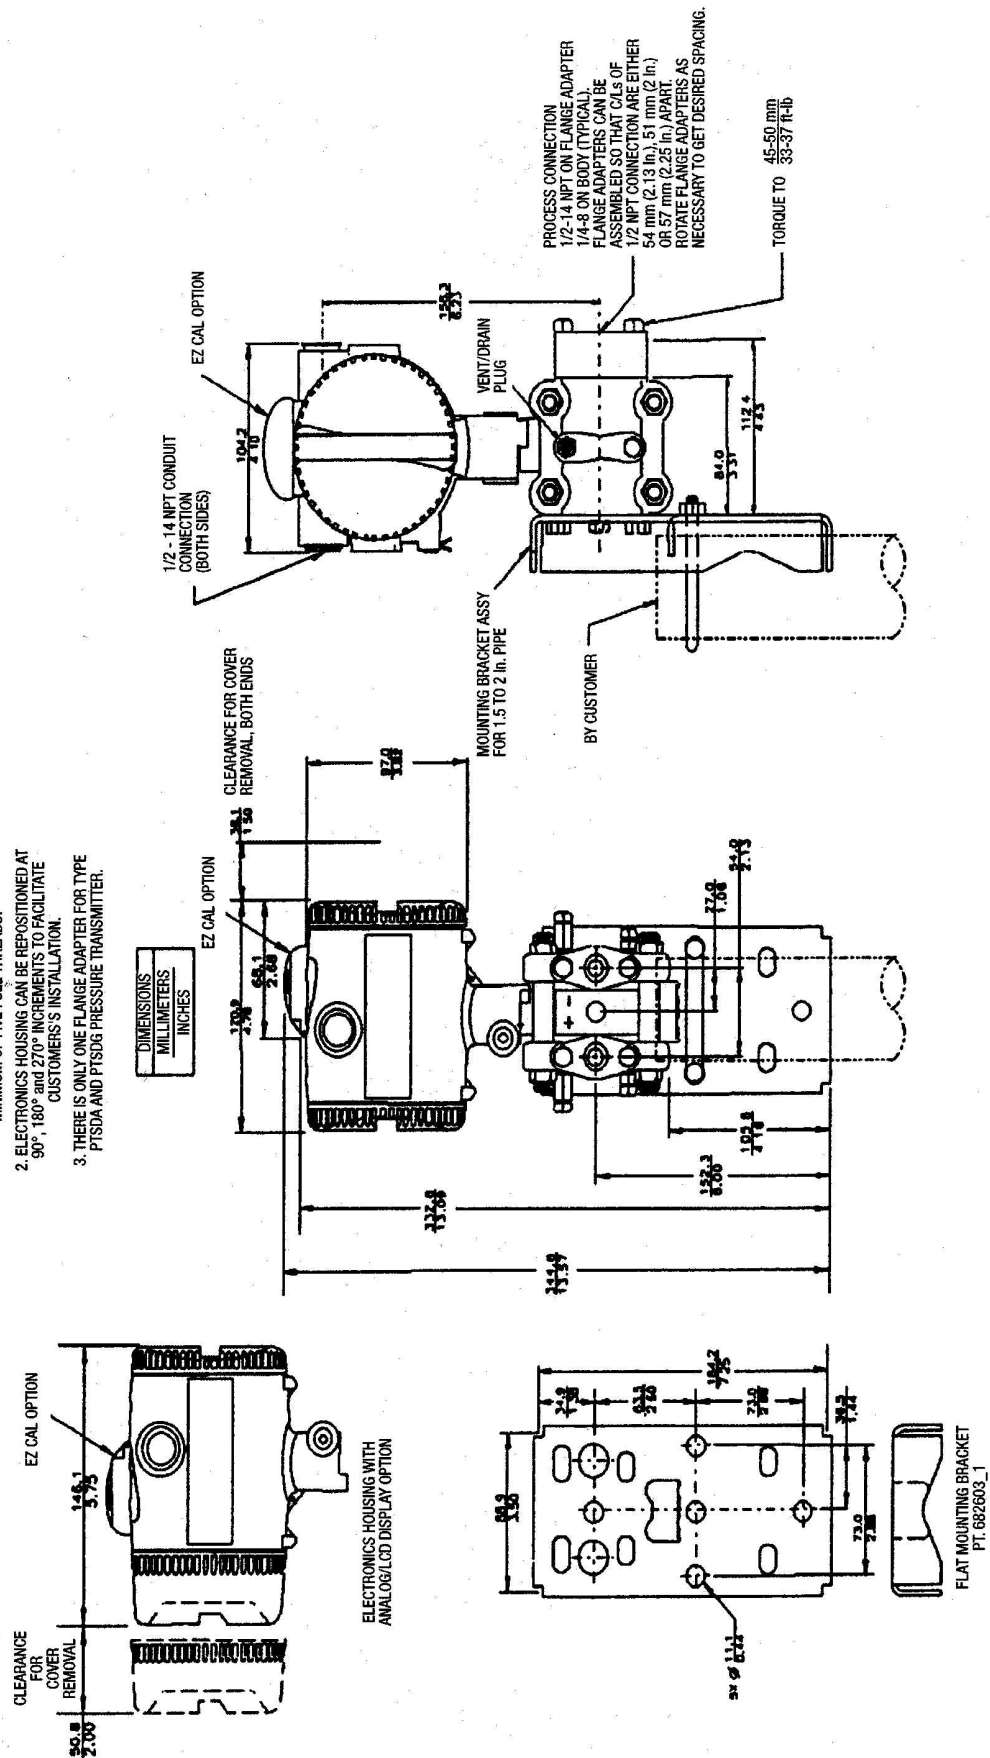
External and Mounting Dimensions for Type PTHD Pressure Transmitters
